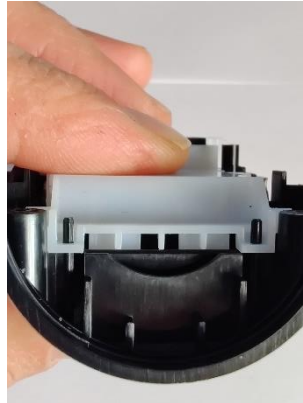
Alignment of the Trigger button Holder onto the Base housing
